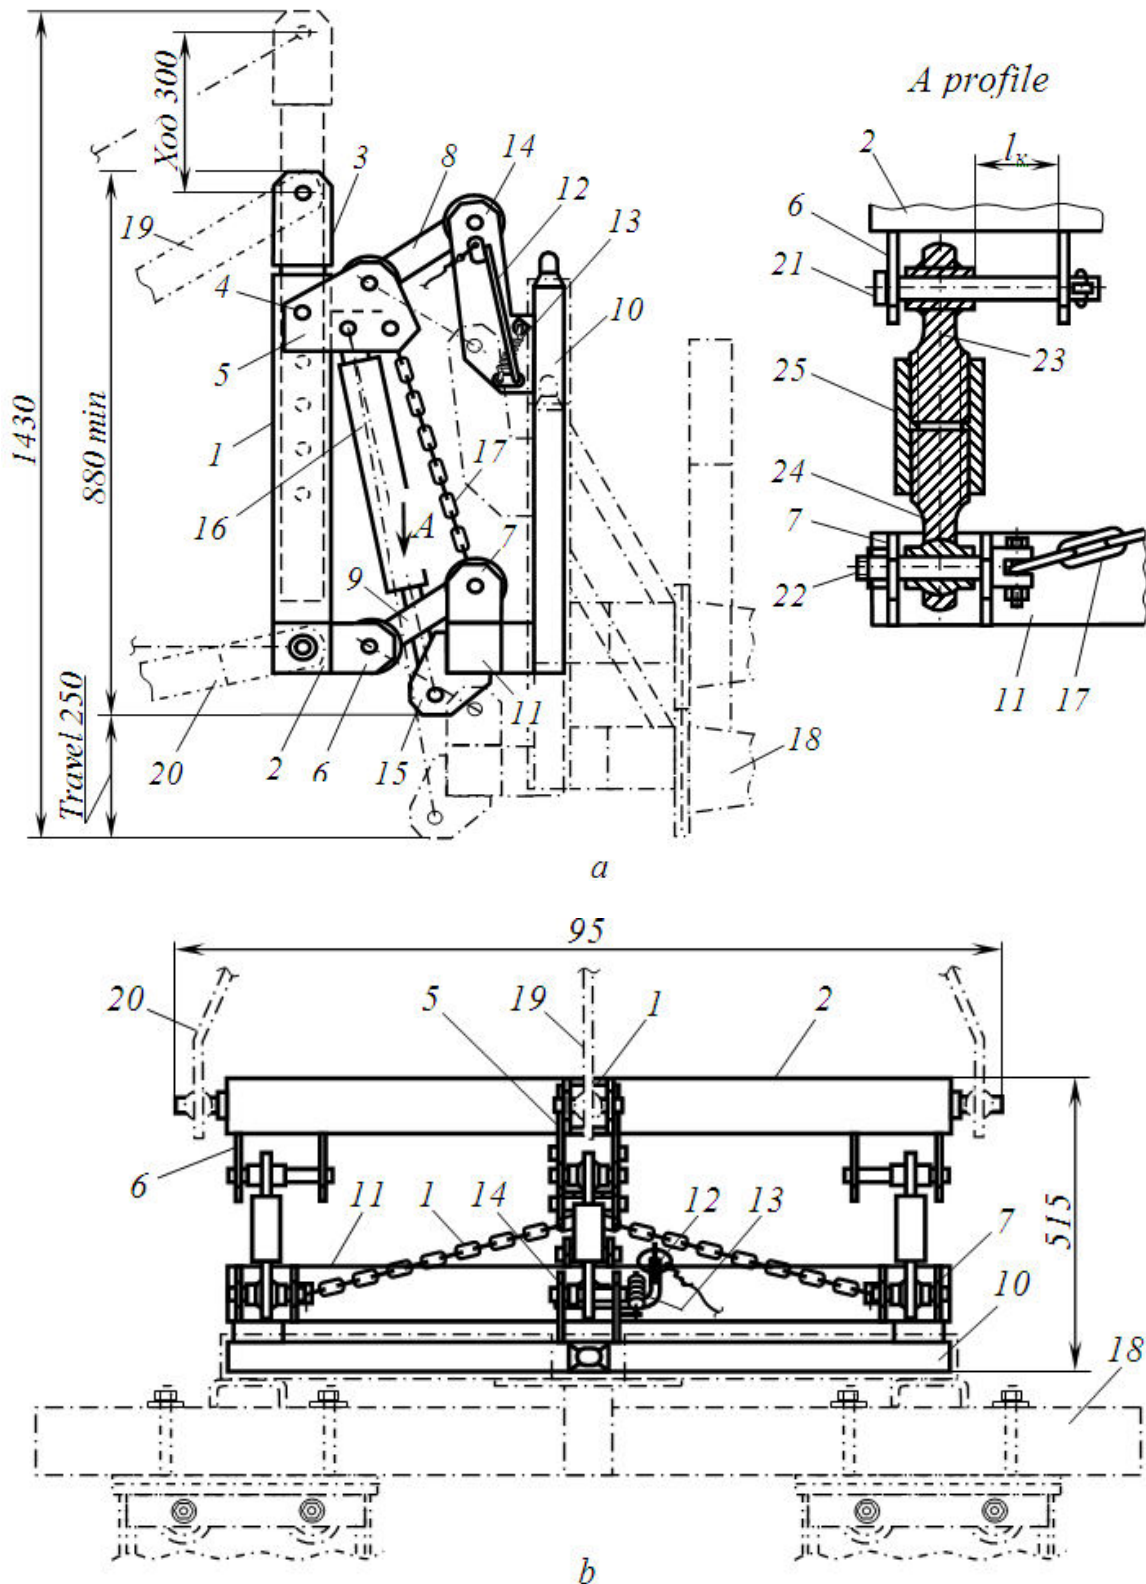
Device with hydraulic PGNA for tractor ancillary equipment with aggregating it with disc tools, equipped with a coupler: *a, b* - side and top views; 1 and 2 - vertical and horizontal frame beams; 3 - retractable stand with eyelet; 4 - catch; 5 - support; 6 and 7 - eyelets; 8 and 9 - upper and lower control arms; 10...15 - respectively: connecting triangle, beam, catch handle, spring, upper and lower supports of coupler frame; 16 - hydraulic cylinder; 17 - chain; 18 - cultivator; 19 and 20 - upper and lower links of the tractor ancillary equipment; 21 and 22 - fingers; 23 and 24 - heads with cylindrical and spherical bushings; 25 - threaded bushing.
